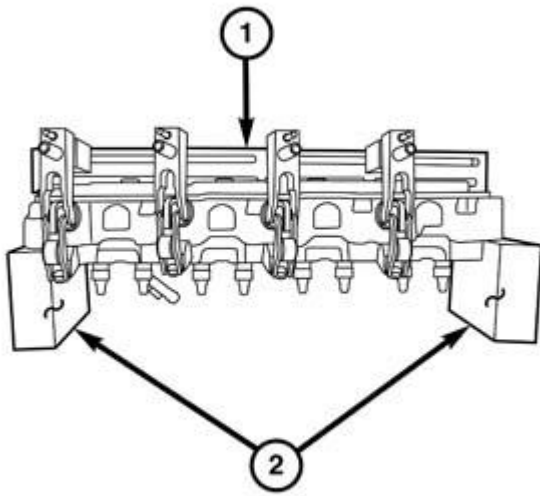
VVAA Block Removal Sequence (2 Of 2)
